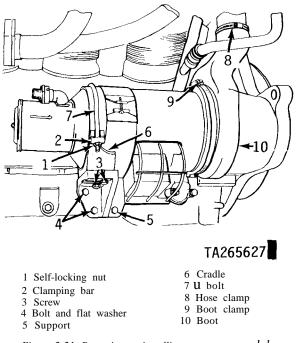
Removing or installing generator, model AVDS-1790-2D and AVDS-1790-2DR engines.
